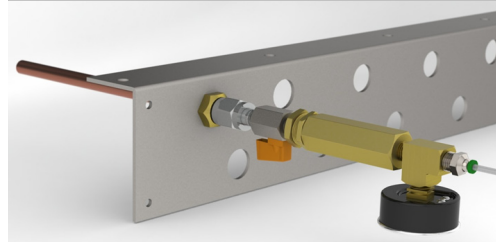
Nitrogen Brake Regulator Assembled to Bracket and Riser
